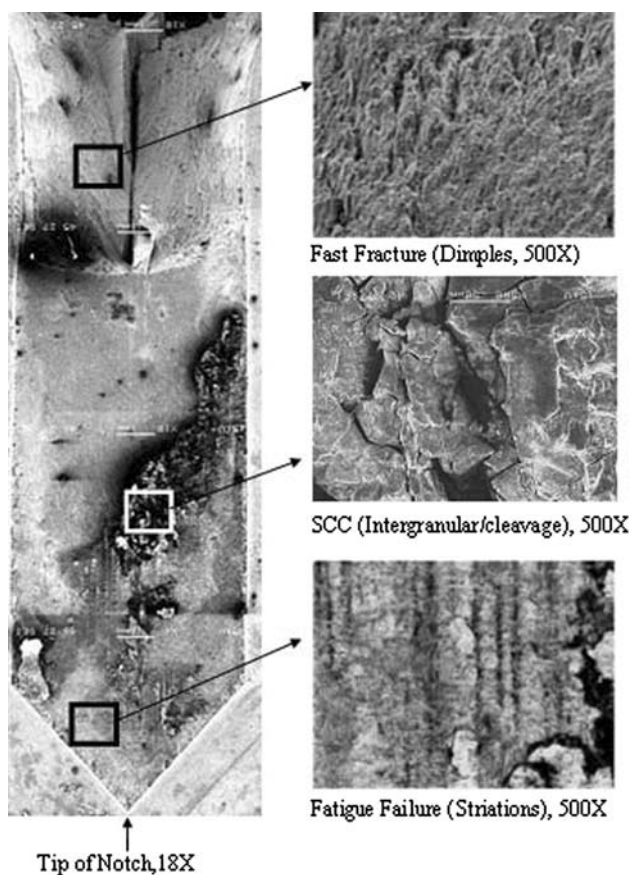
Fracture morphology at different regions of a broken DCB specimen
